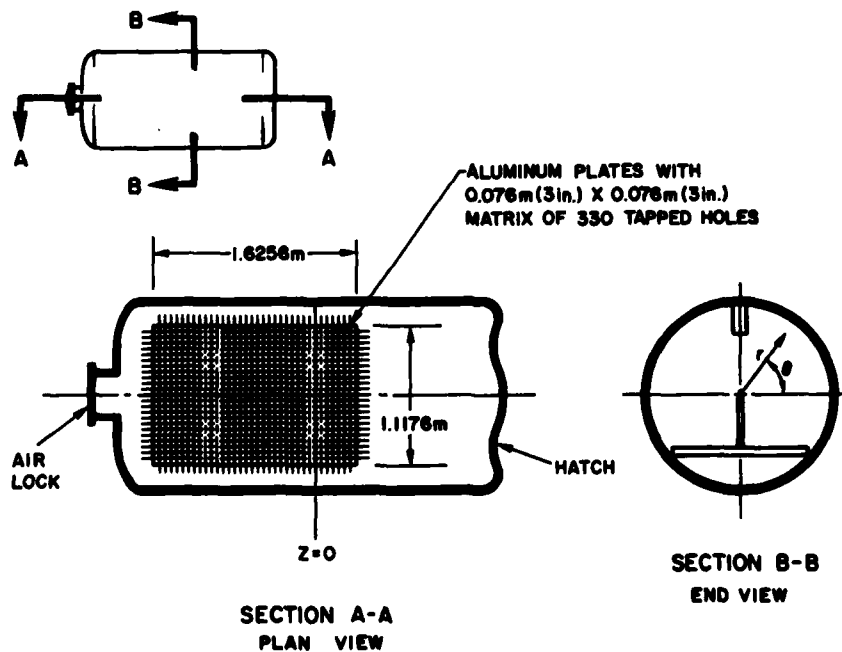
Plan and end views of Tank 2, showing cylindrical coordinates and matrix of 330 tapped holes
